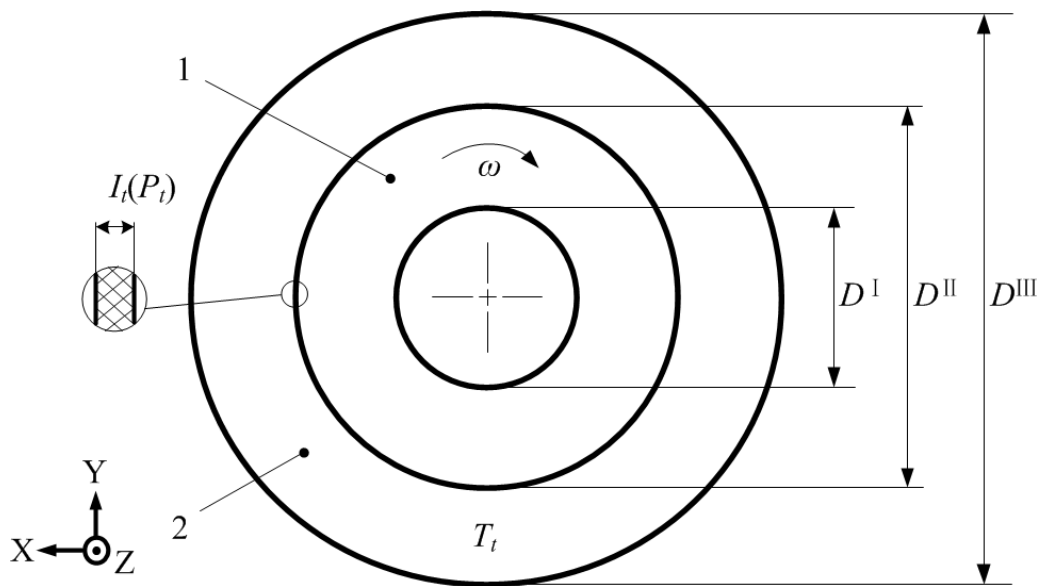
Thermo-mechanical modeling of the interference assembled rotating ring geometries
